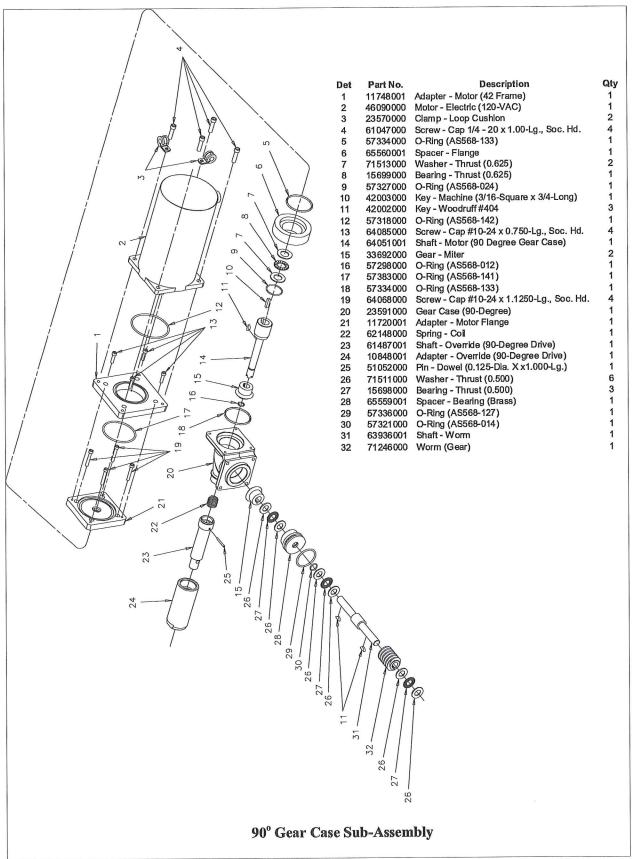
Obsolete Design – Part Number 81417001 - 90° Gear Case Sub – Assembly
